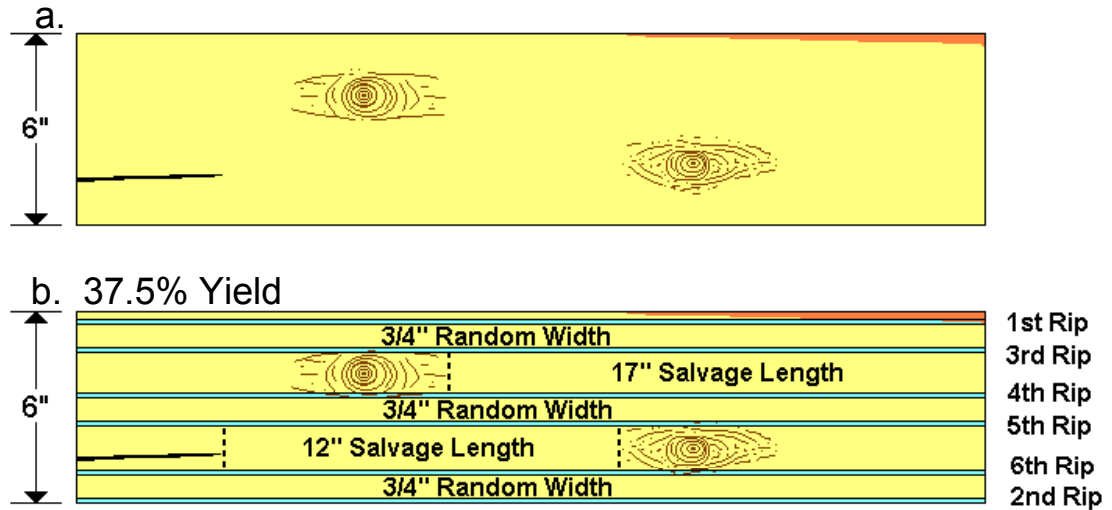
Board section containing many defects from which only random width strips can be ripped. Salvageable areas are also shown.
